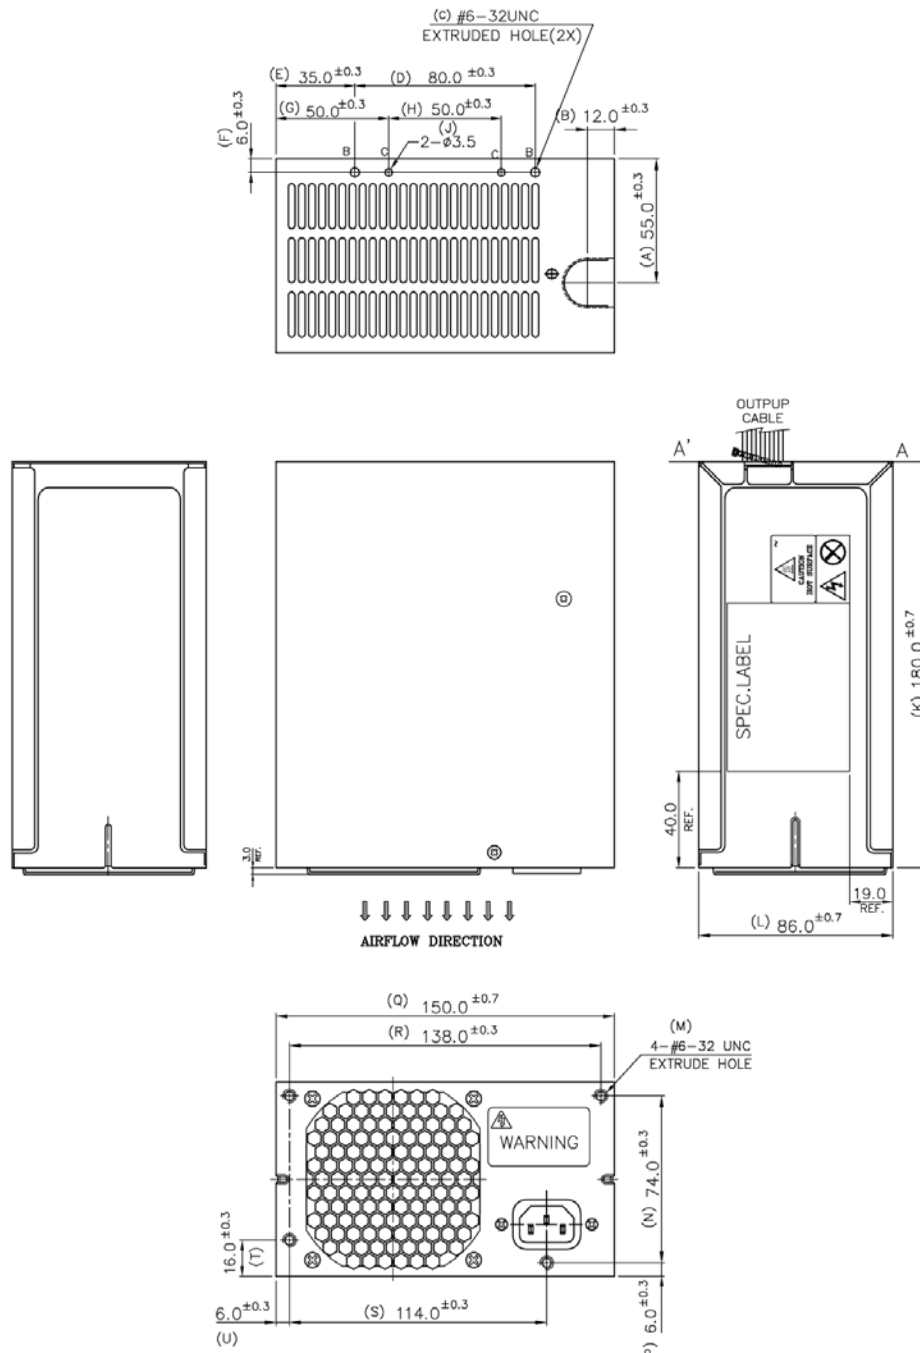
Mechanical Drawing for the Power Supply Enclosure
